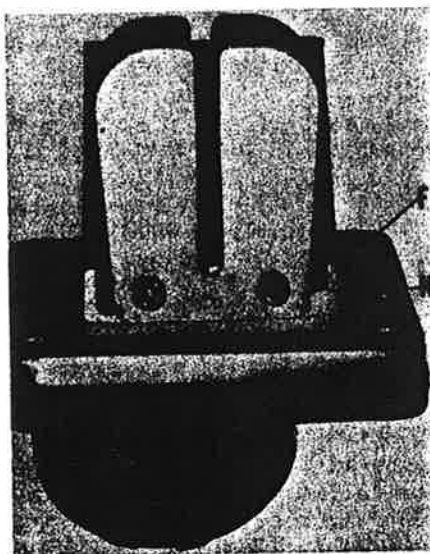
Cutaway (N) at edge of reed petal should be installed next to flat (F) on reed stopper plate.
